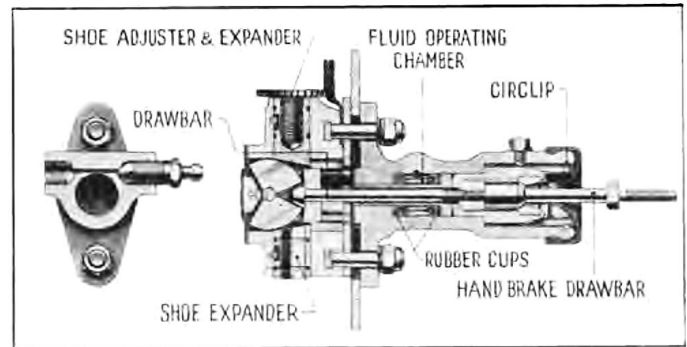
BRAKE OPERATING CYLINDER—REAR.
